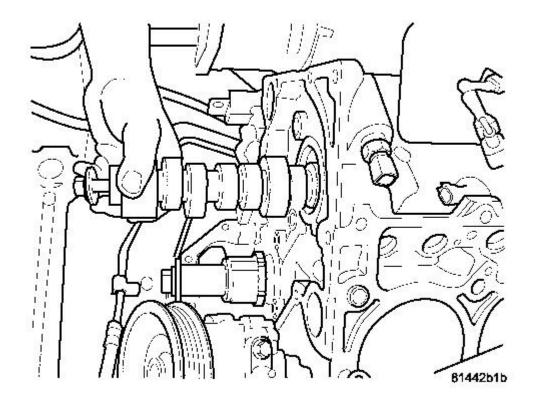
Removing/Installing Camshaft Courtesy of CHRYSLER LLC
